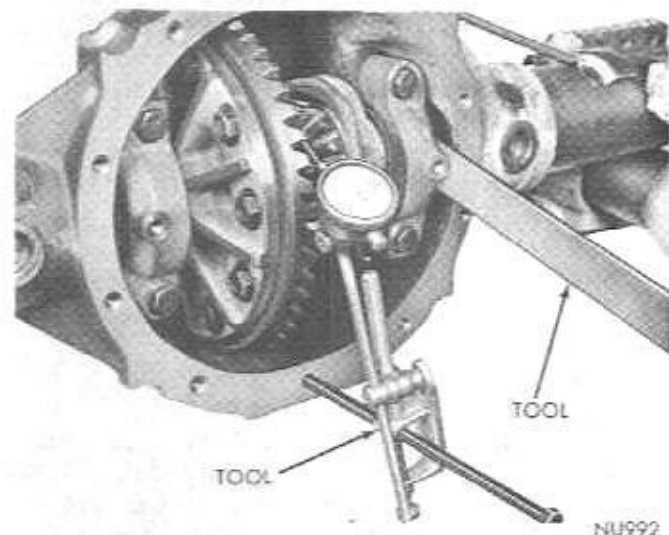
Measuring and Adjusting Backlash between Drive Gear and Pinion
